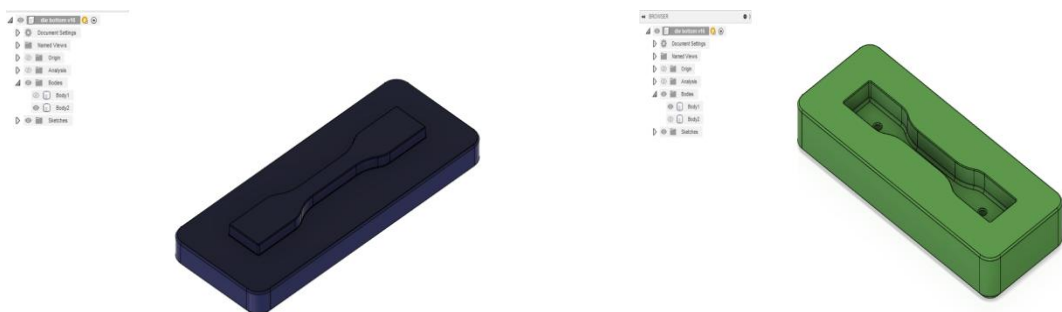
(a) Male Die CAD design; (b) Female Die CAD design
